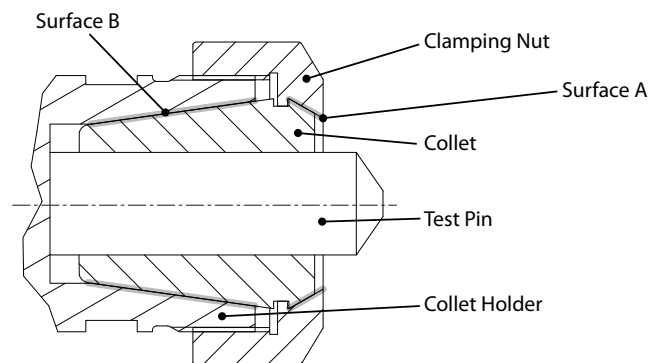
Detail drawing: Holding fixture - for a complete drawing see Appendix B-B6
